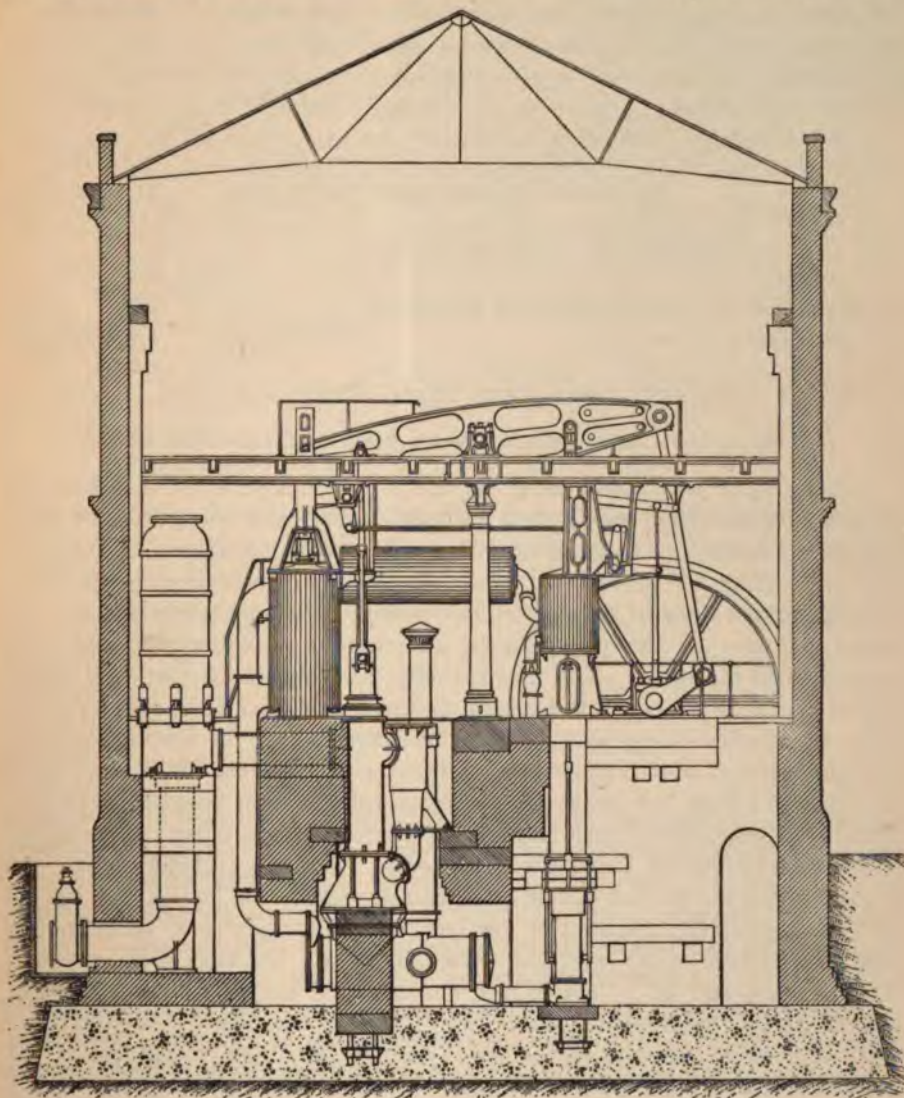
J Simpson & Co.: MacNaught Beam Pumping Engines, Lambeth Water-works, Brixton Station.
